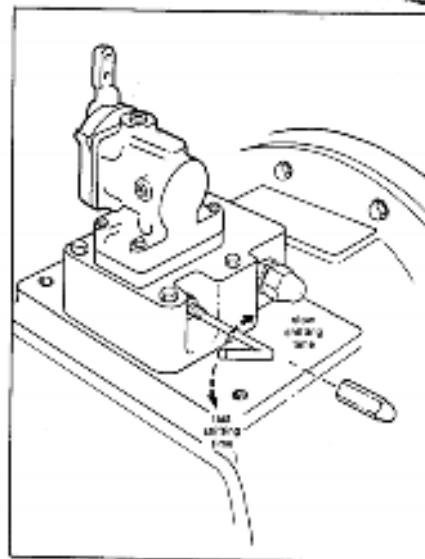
Clutch Cylinder Timing Adjustment; used to regulate shifting time.
